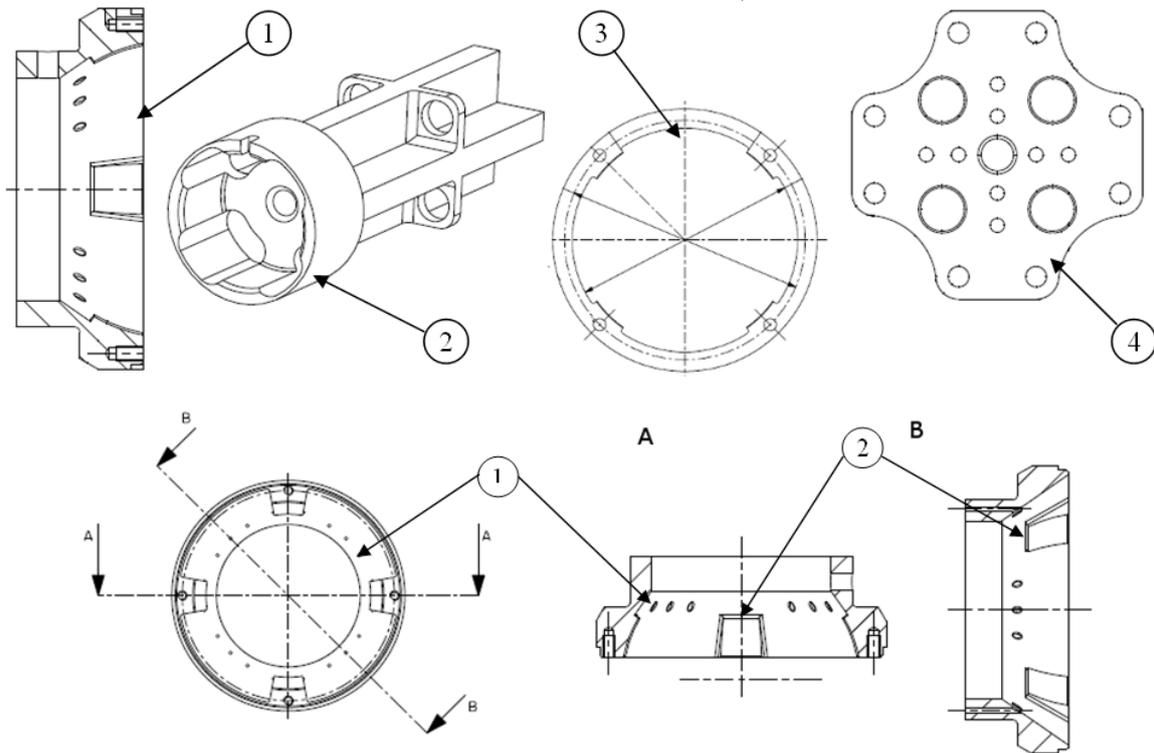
(Top) CAD model of the supporting structure: 1) Eyeball support, 2) Frame, 3) Front flange, 4) Rear flange. (Bottom) CAD model of the eyeball support: posterior and two lateral view (A,B): 1) Pointwise pulley holes, 2) Screw holes.
